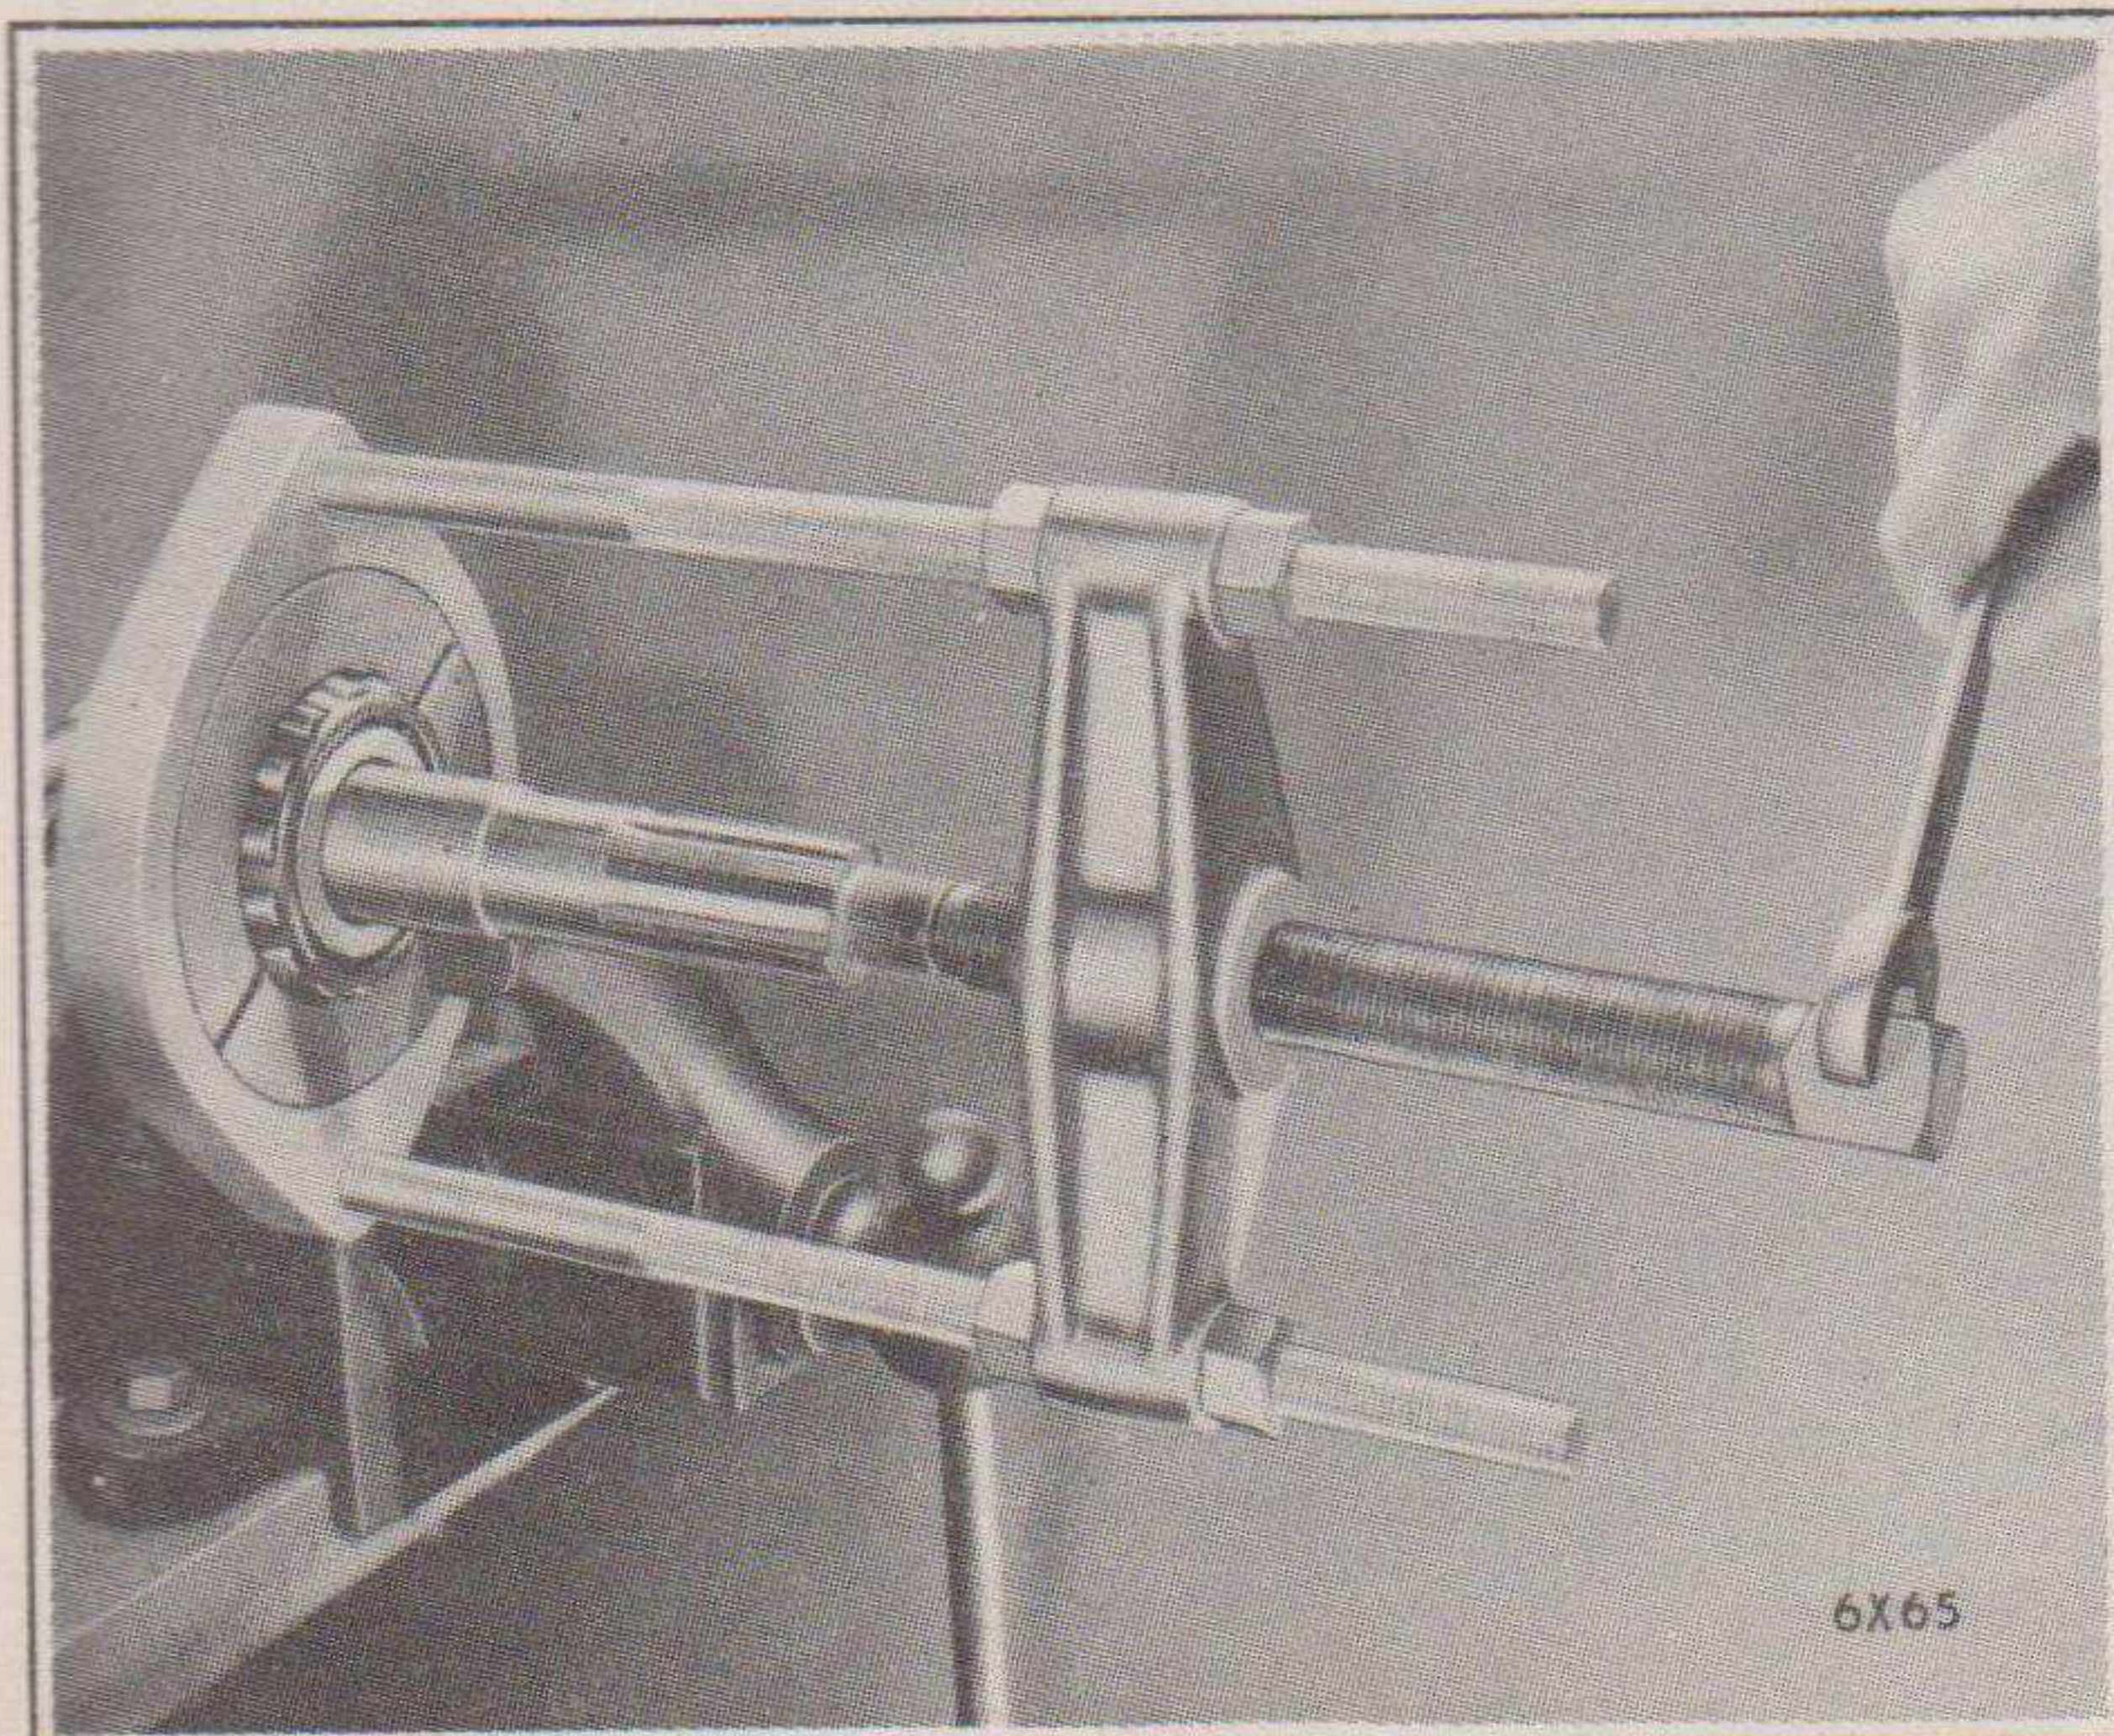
Removing Drive Pinion Bearing with Tool C-293-U
